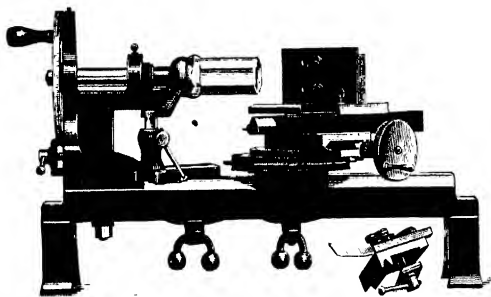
Latest form of Goldschmidt Crystal-Model-making Machine.
